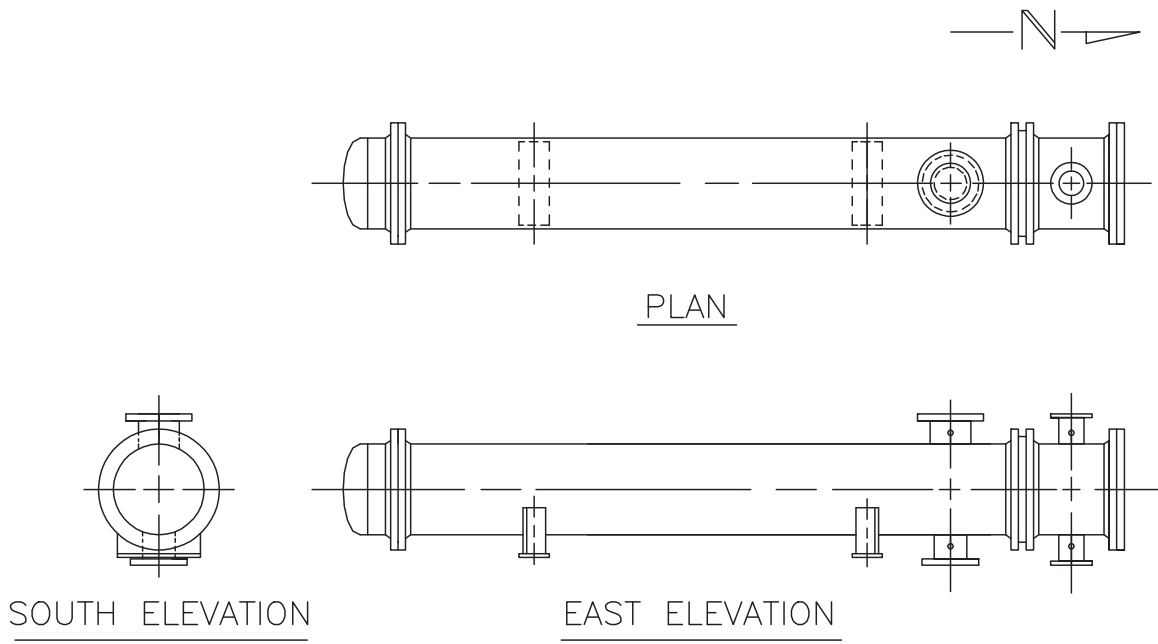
Shell and tube exchanger Plan and Elevation views.
